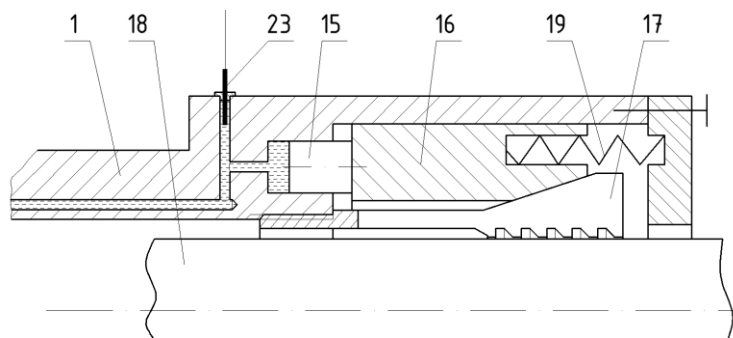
Fragment of the clamping chuck with drive plungers of the hydraulic system
